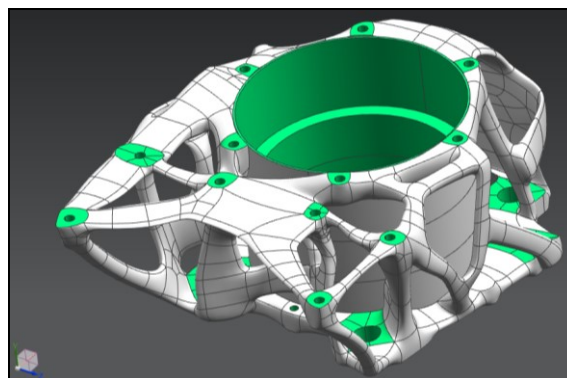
AM component Flange after optimization and clarification with manufacturer
